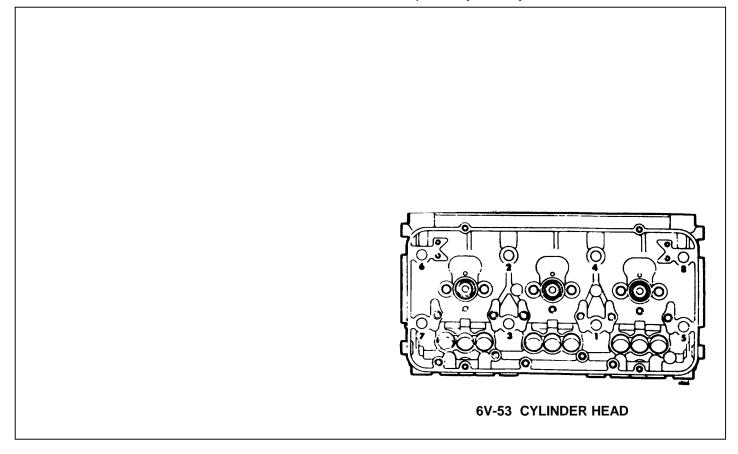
Sequence for Tightening Cylinder Head Bolts
